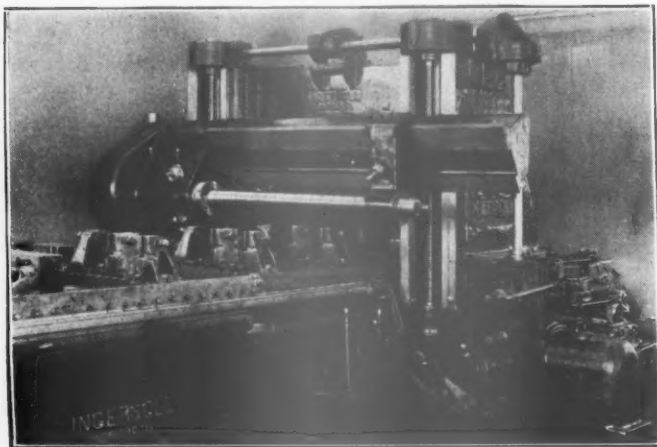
Fixture for holding almost every style of locomotive driving rod
